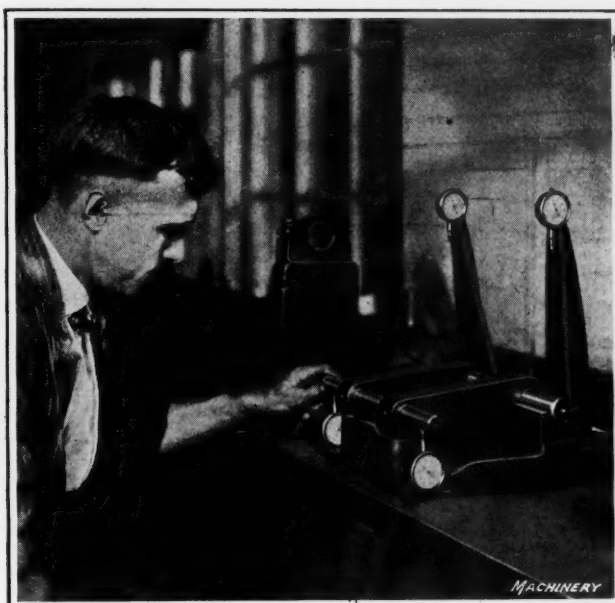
Adjusting the Fixture used for testing Parallelism of Connecting-rod Bearings
